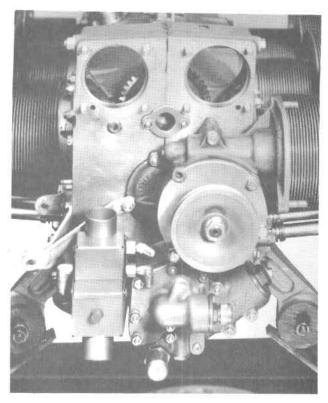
OIL PUMP, FUEL PUMP AND STARTER ADAPTER INSTALLED.
